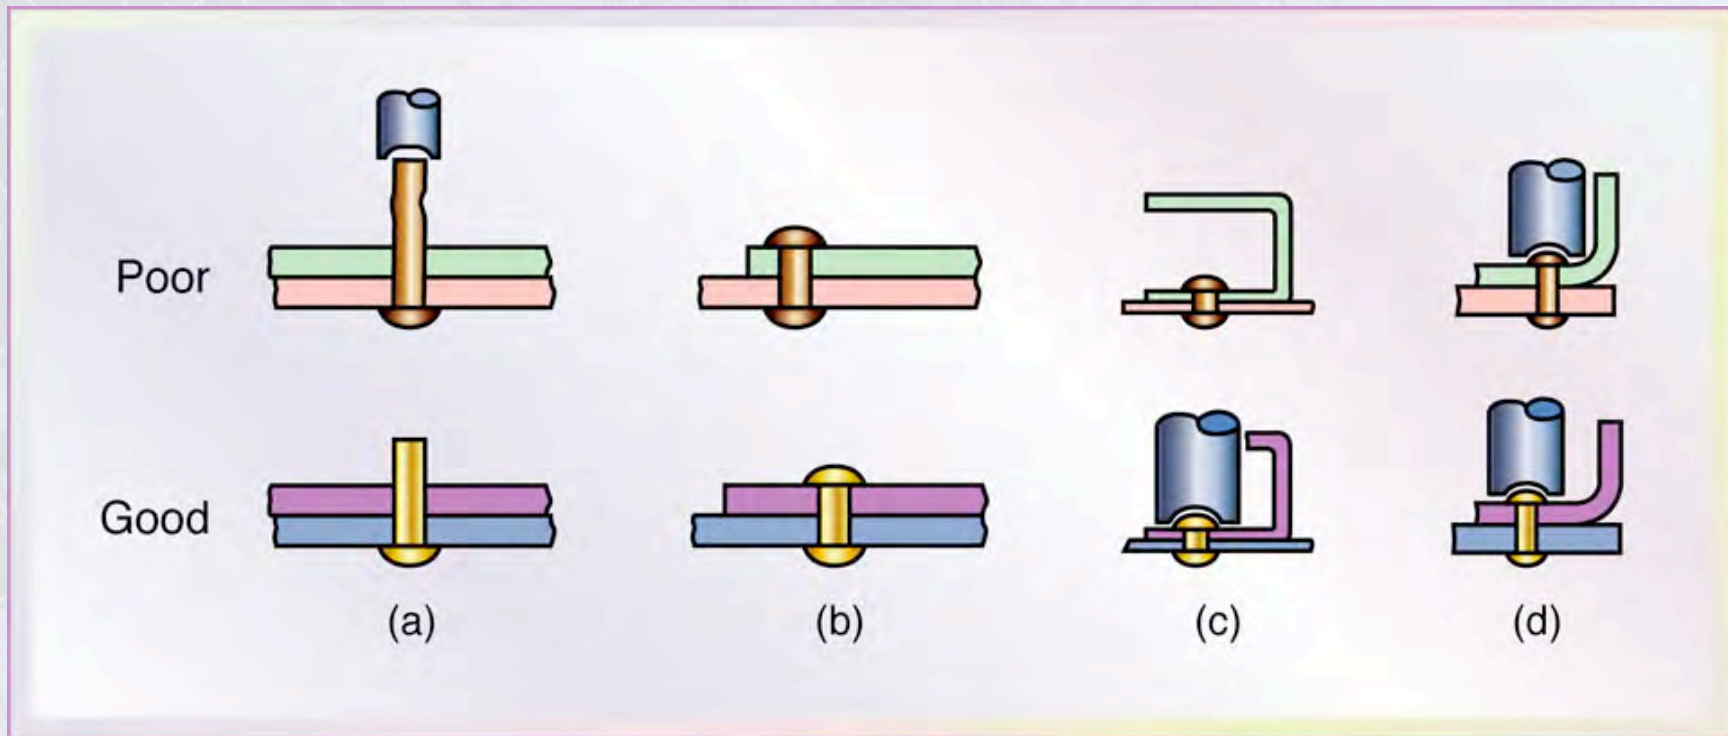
Design guidelines for riveting. (a) Exposed shank is too long; the result is buckling instead of upsetting. (b) Rivets should be placed sufficiently far from edges to avoid stress concentrations. (c) Joined sections should allow ample clearance for the riveting tools. (d) Section curvature should not interfere with the riveting process. *Source:* After J. G. Bralla.
